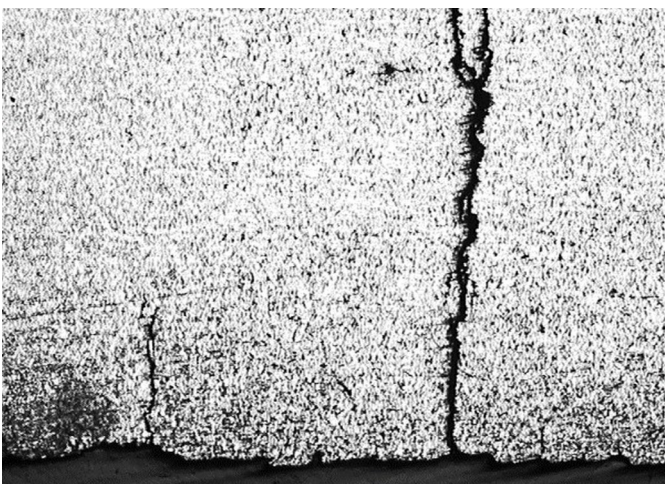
Crack in the bend material in the vicinity of the A1 welded joint. 100x magnification, nital etching
